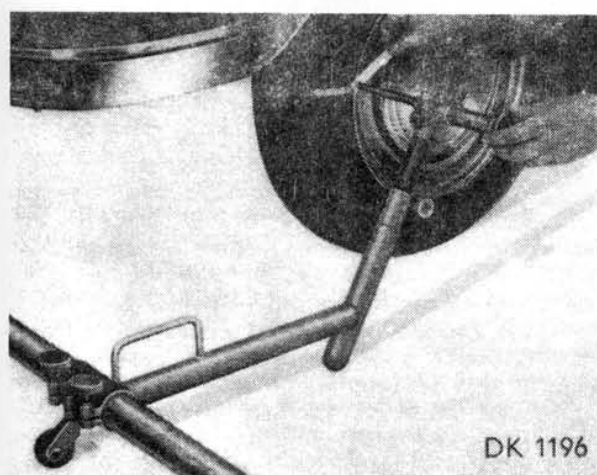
/7 - Checking Front Wheel Toe-in Using MP 8-152 Gauge
